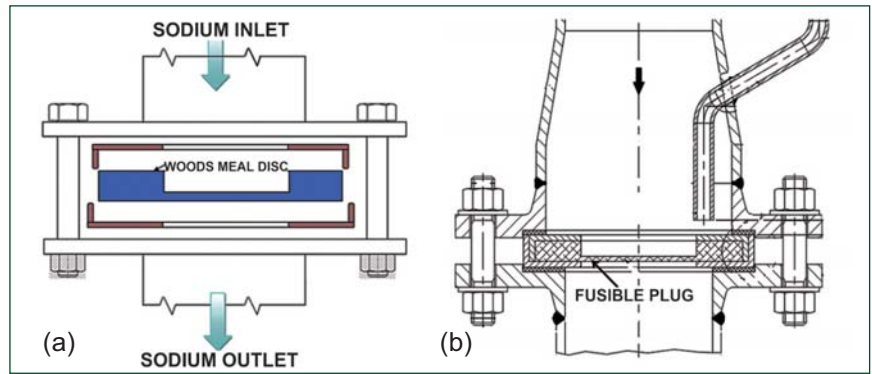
Enlarged view of system (a) fusible plug assembly and (b) plug with vent port
